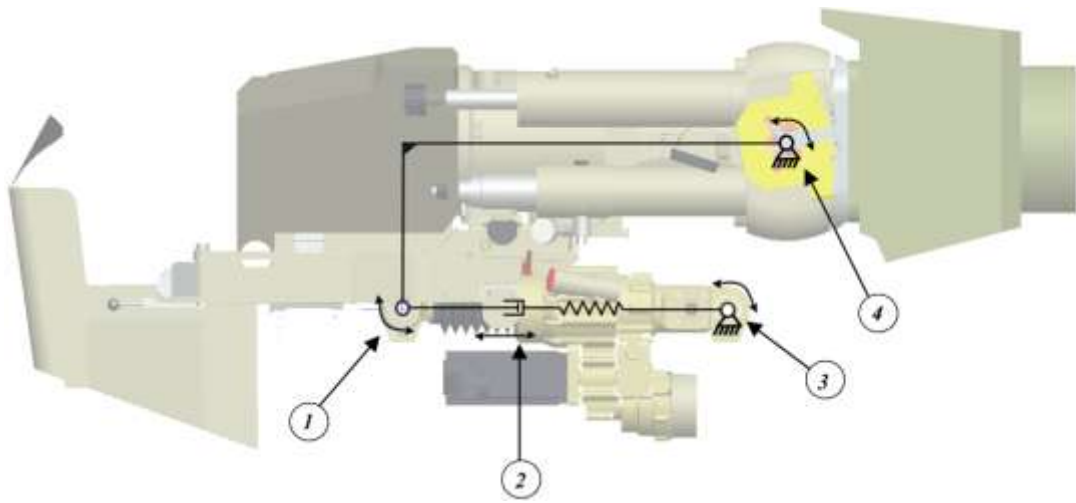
Representative view of joints and links of included slider mechanism model. 1) Revolute joint between the actuator and the barrel. 2) Slider joint inside the actuator. 3) Pinned joint between the actuator and the turret. 4) Pinned joint between the barrel and the turret.
